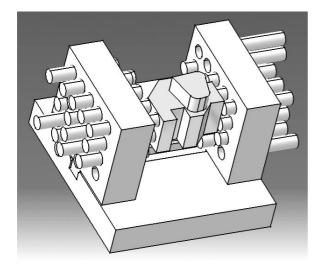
Illustration of pin type reconfigurable clamping fixture.
